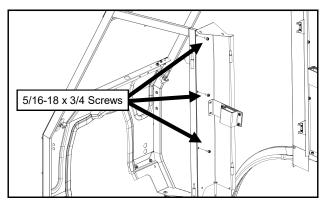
(Rear Leg to Side Frame Fasteners)
